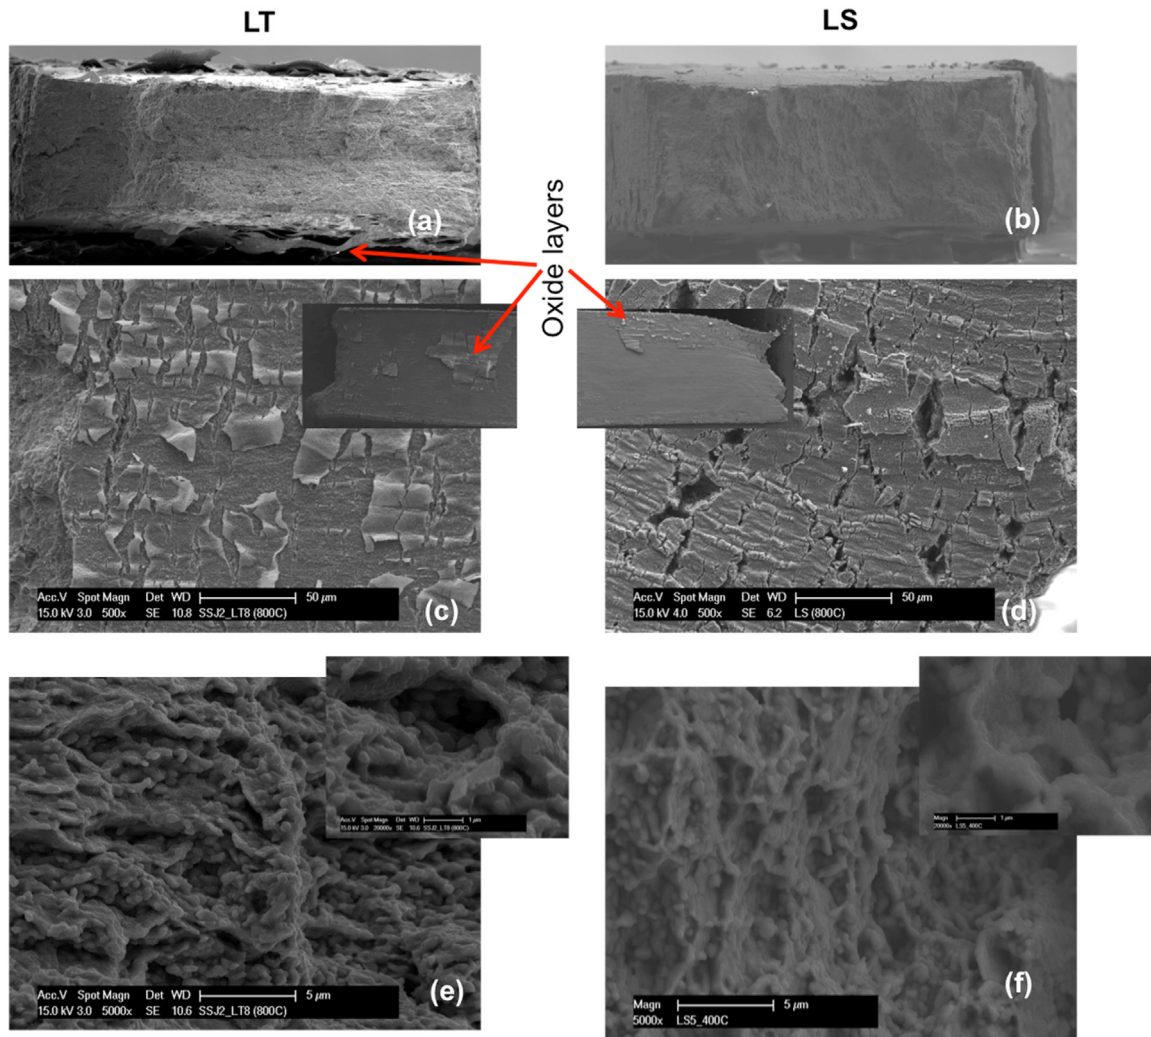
Images of NFA-1 LT (left) and LS (right) tensile specimens tested at 800 °C showing: (a–b) macro views of a fracture surface; (c–d) macro (insert) and higher magnification views of a tensile specimen side surface; and (e–f) high magnification images of ductile fracture surfaces. See text for a discussion.
